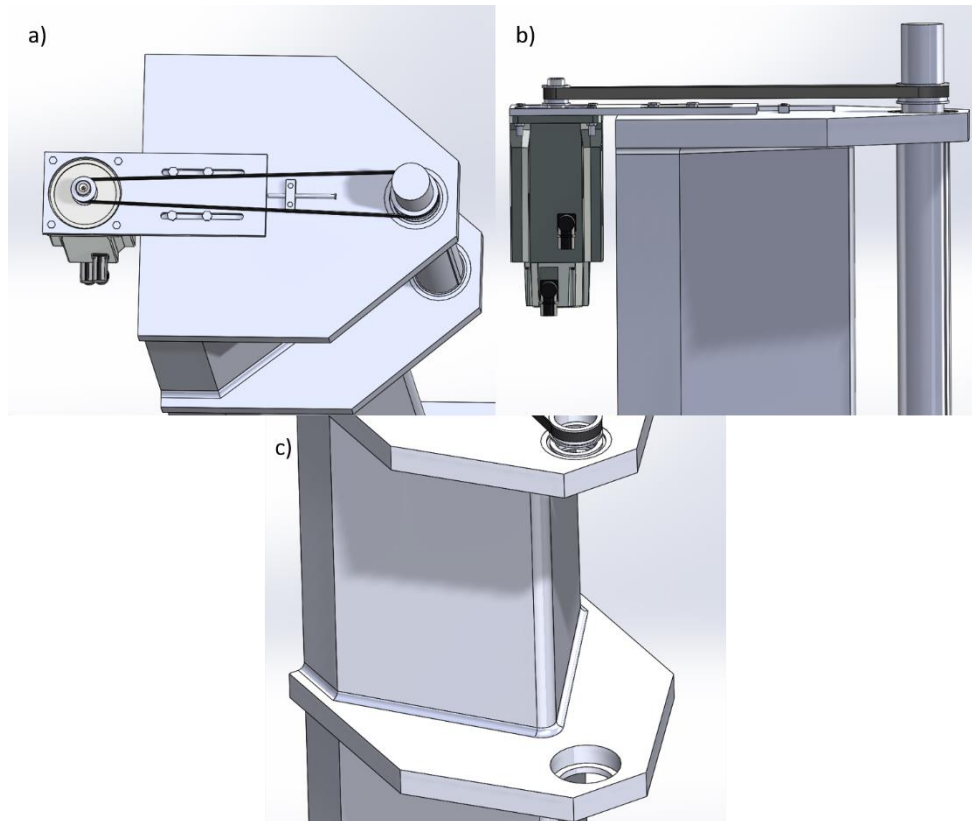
CAD model of the final design of the beam in phase 1. a) shows the top view of the beam while b) shows the side view. The hole in which the bottom bearing is placed, is shown in c).
